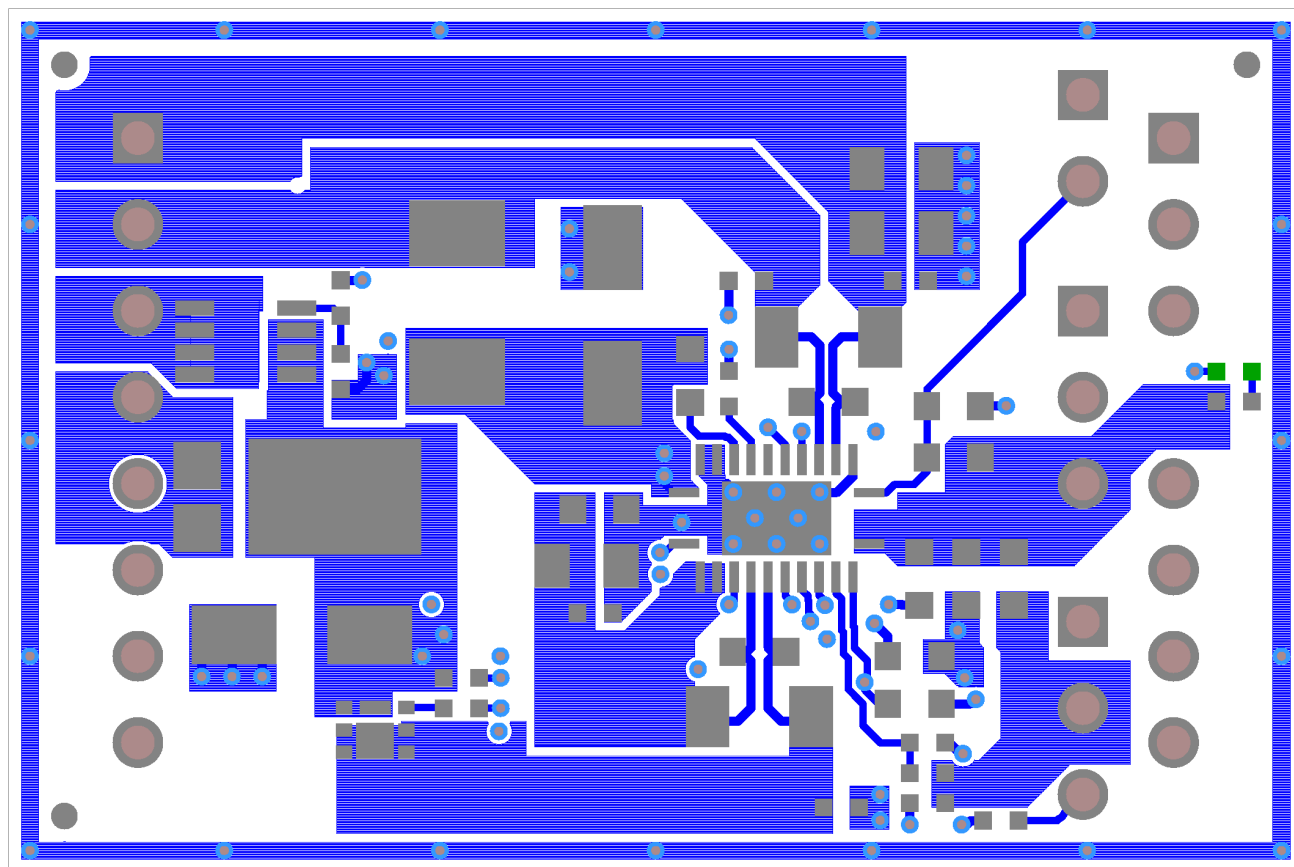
SMP-BQ24133-MVK Board Layer 1 – Top Side
